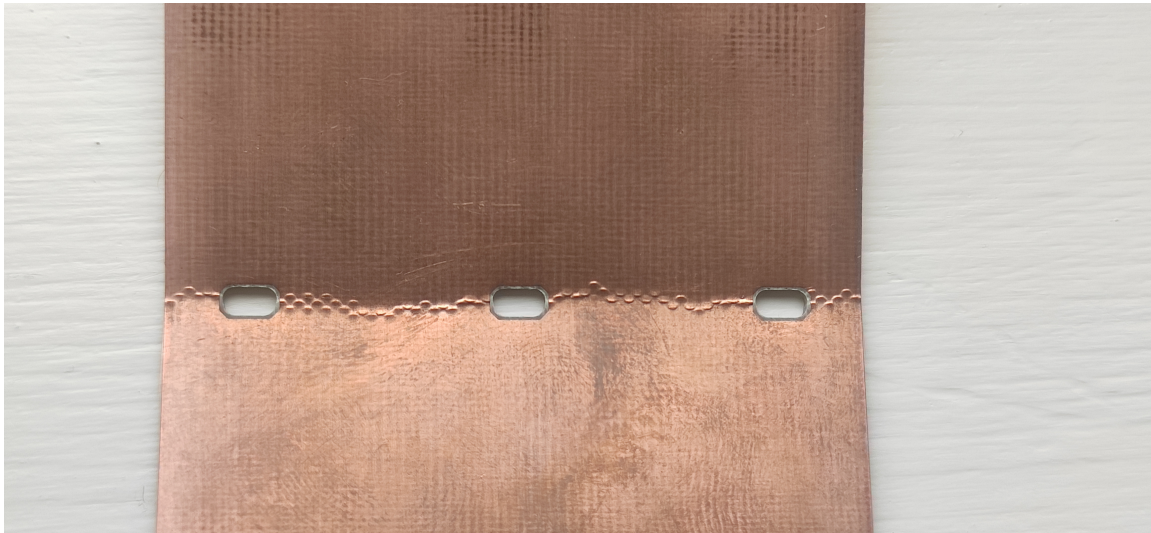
Top side of the mechanical test specimen "Eco3" after the three-point-bending test.
